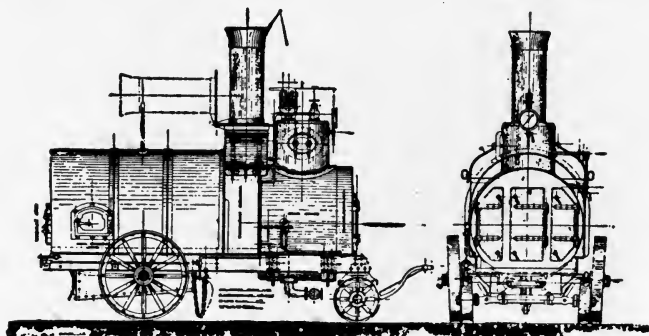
THE MELDRUM PORTABLE DESTROYER.
